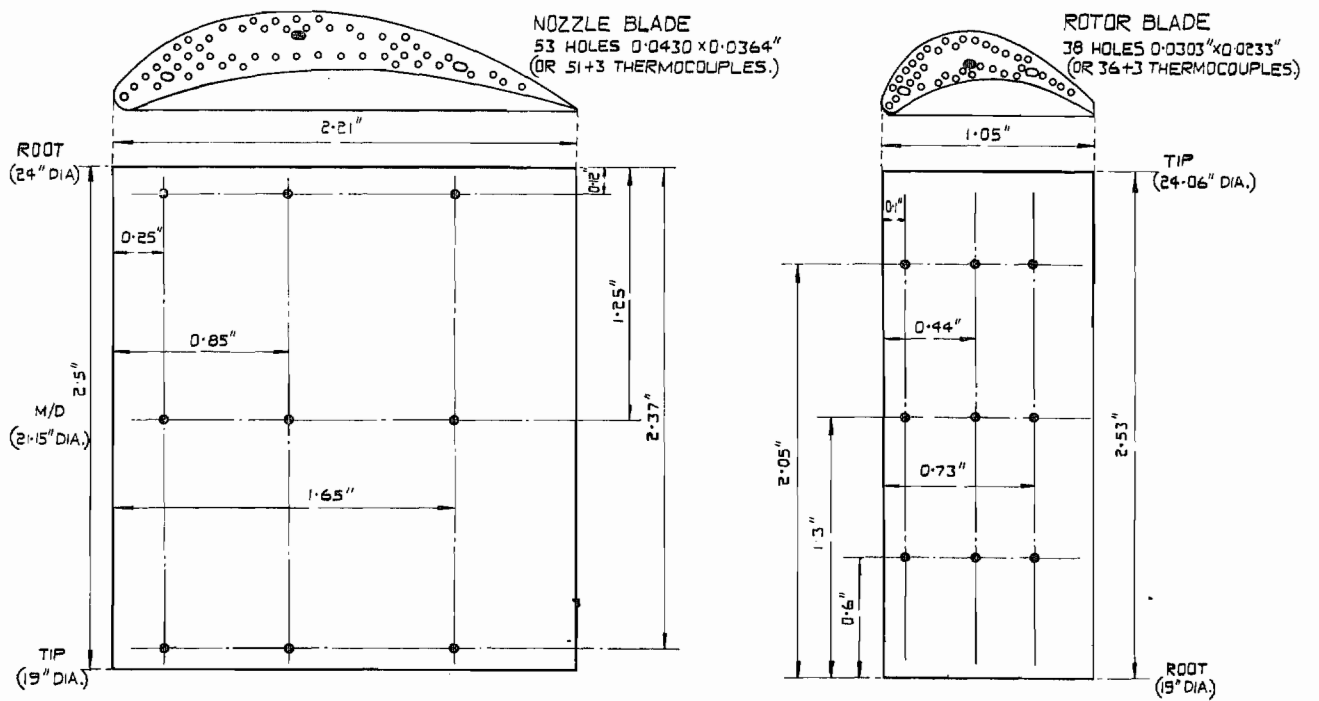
Location of thermocouples in nozzle and rotor blades.
